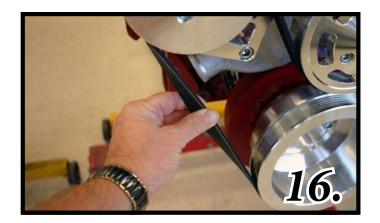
Push both the Alternator and A/C units inwards at the top mounts and install the serpentine belt routing as shown,  $87\frac{1}{2}$ " belt for kits with Power Steering. Non-Power steering kits will bypass the P/S Pulley with a shorter  $72\frac{1}{2}$ " belt.
